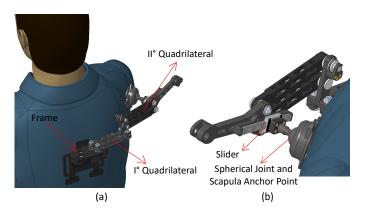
First branch (back-shoulder) composed of 2 four-bar mechanisms, 1 passive slider, and 1 passive spherical joint.
